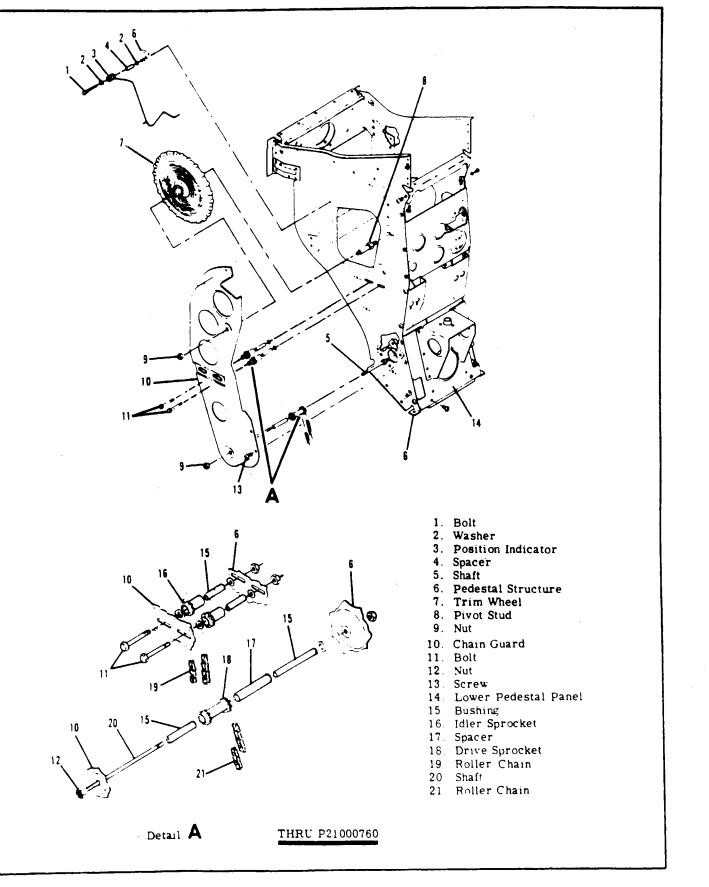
Elevator Trim Wheel Installation (Sheet 1 of 2)
